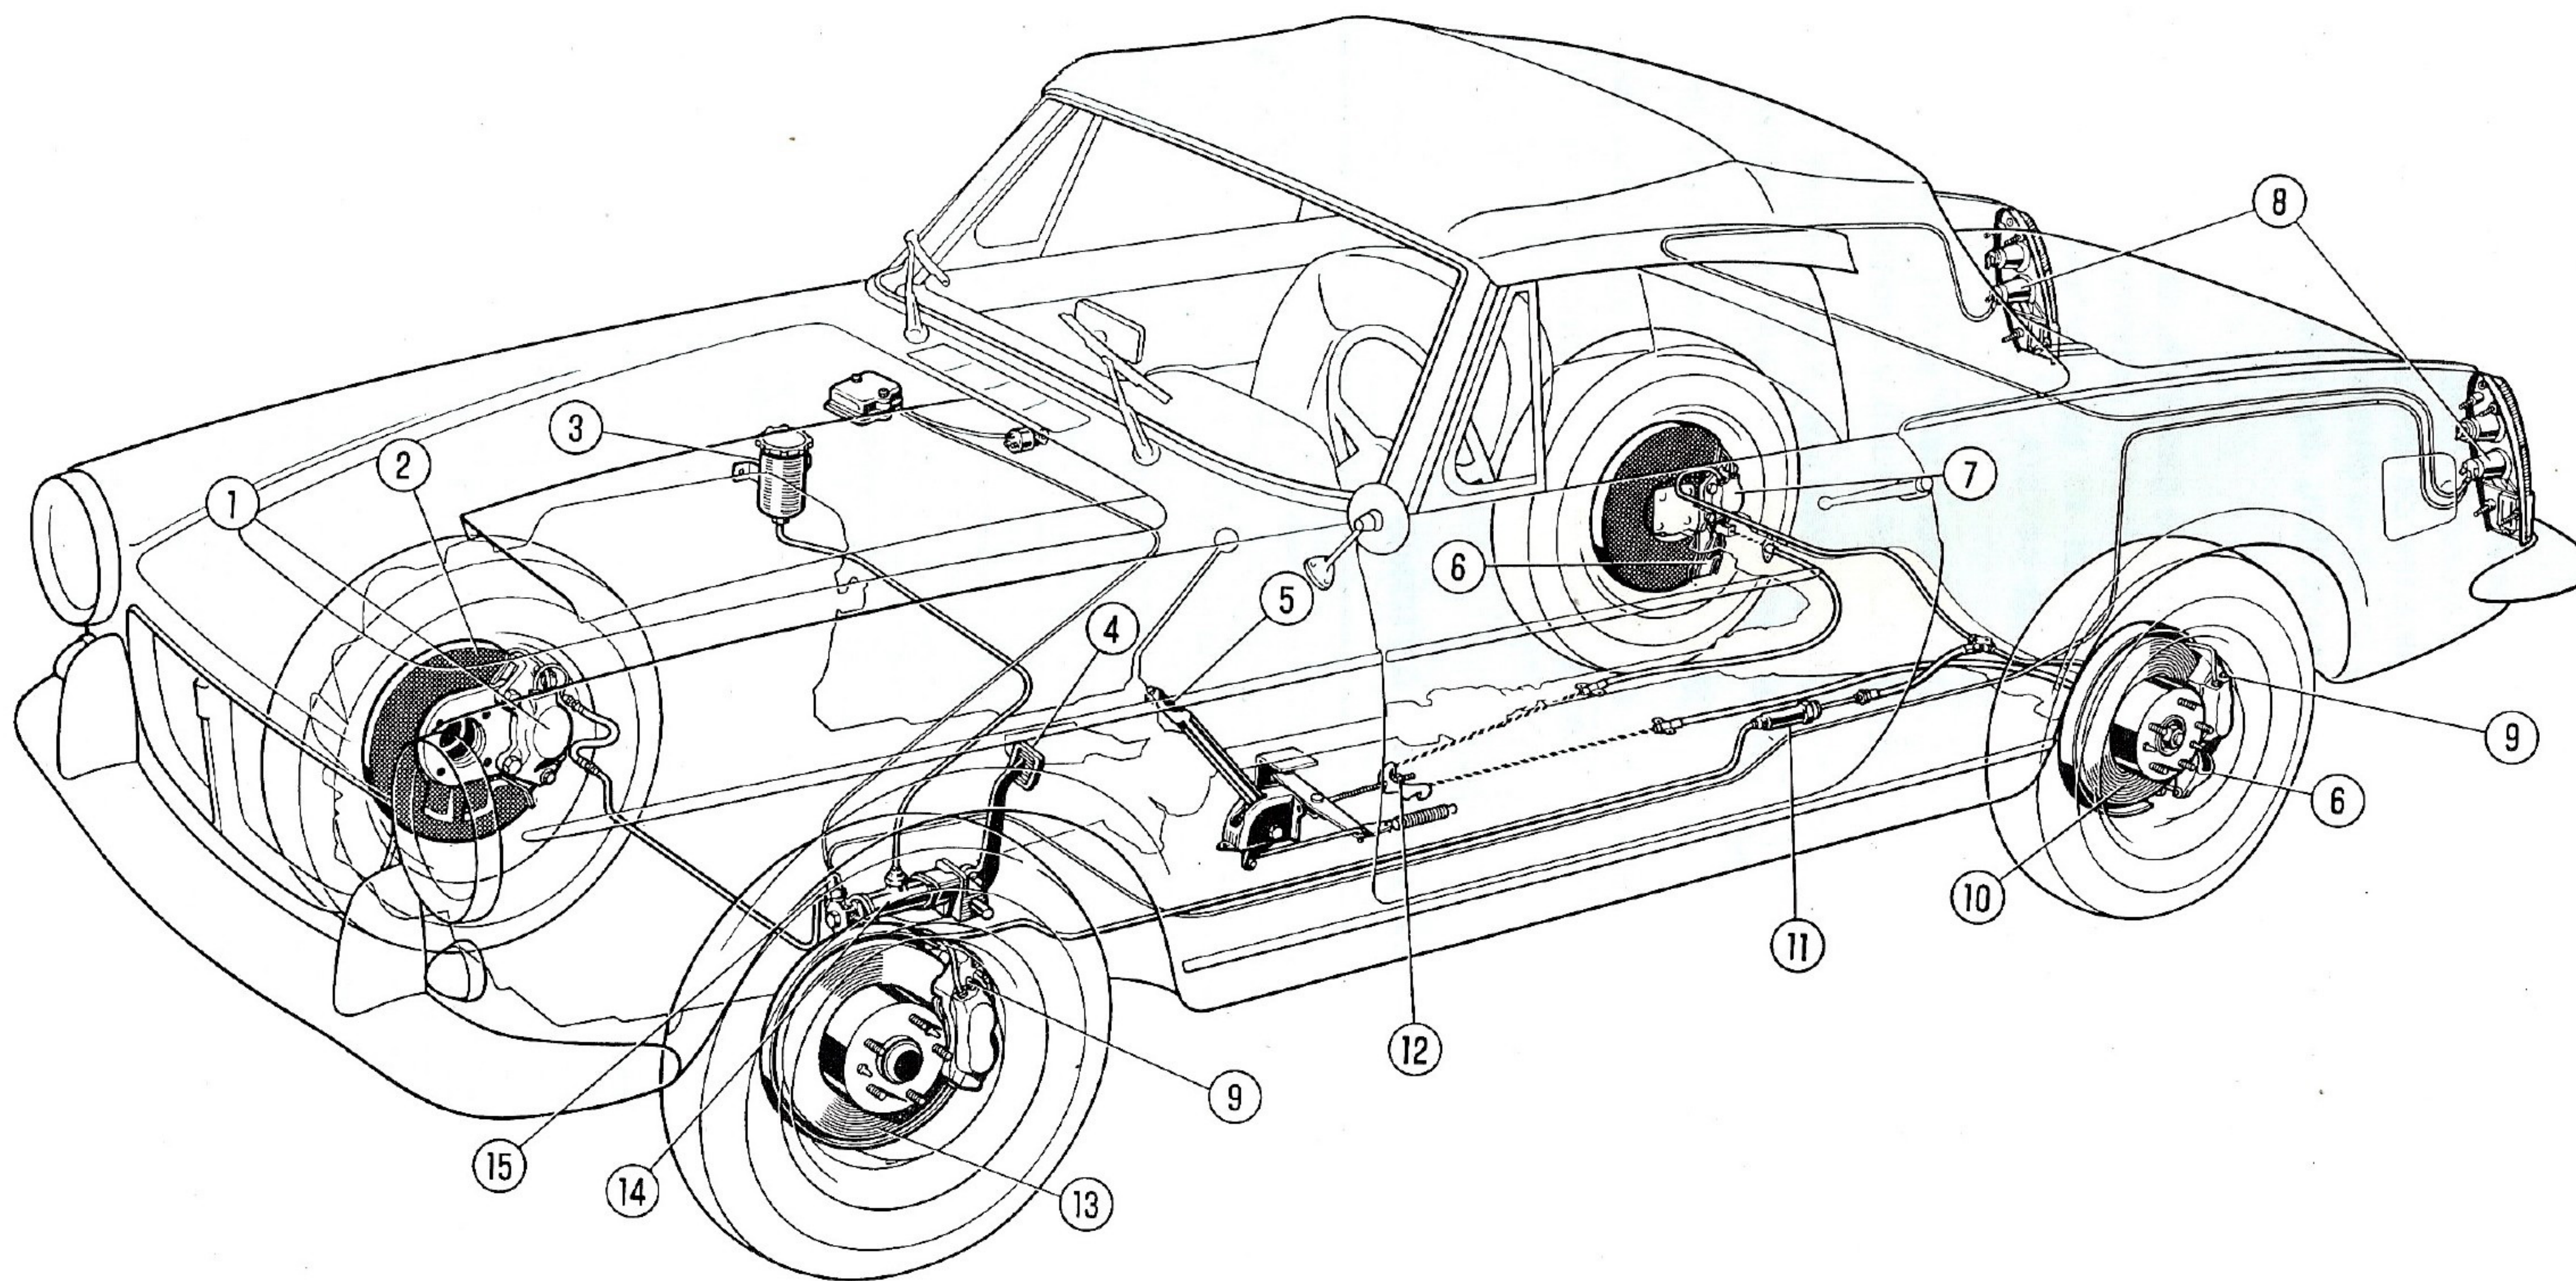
Hydraulic service and mechanical hand brake system diagram.
